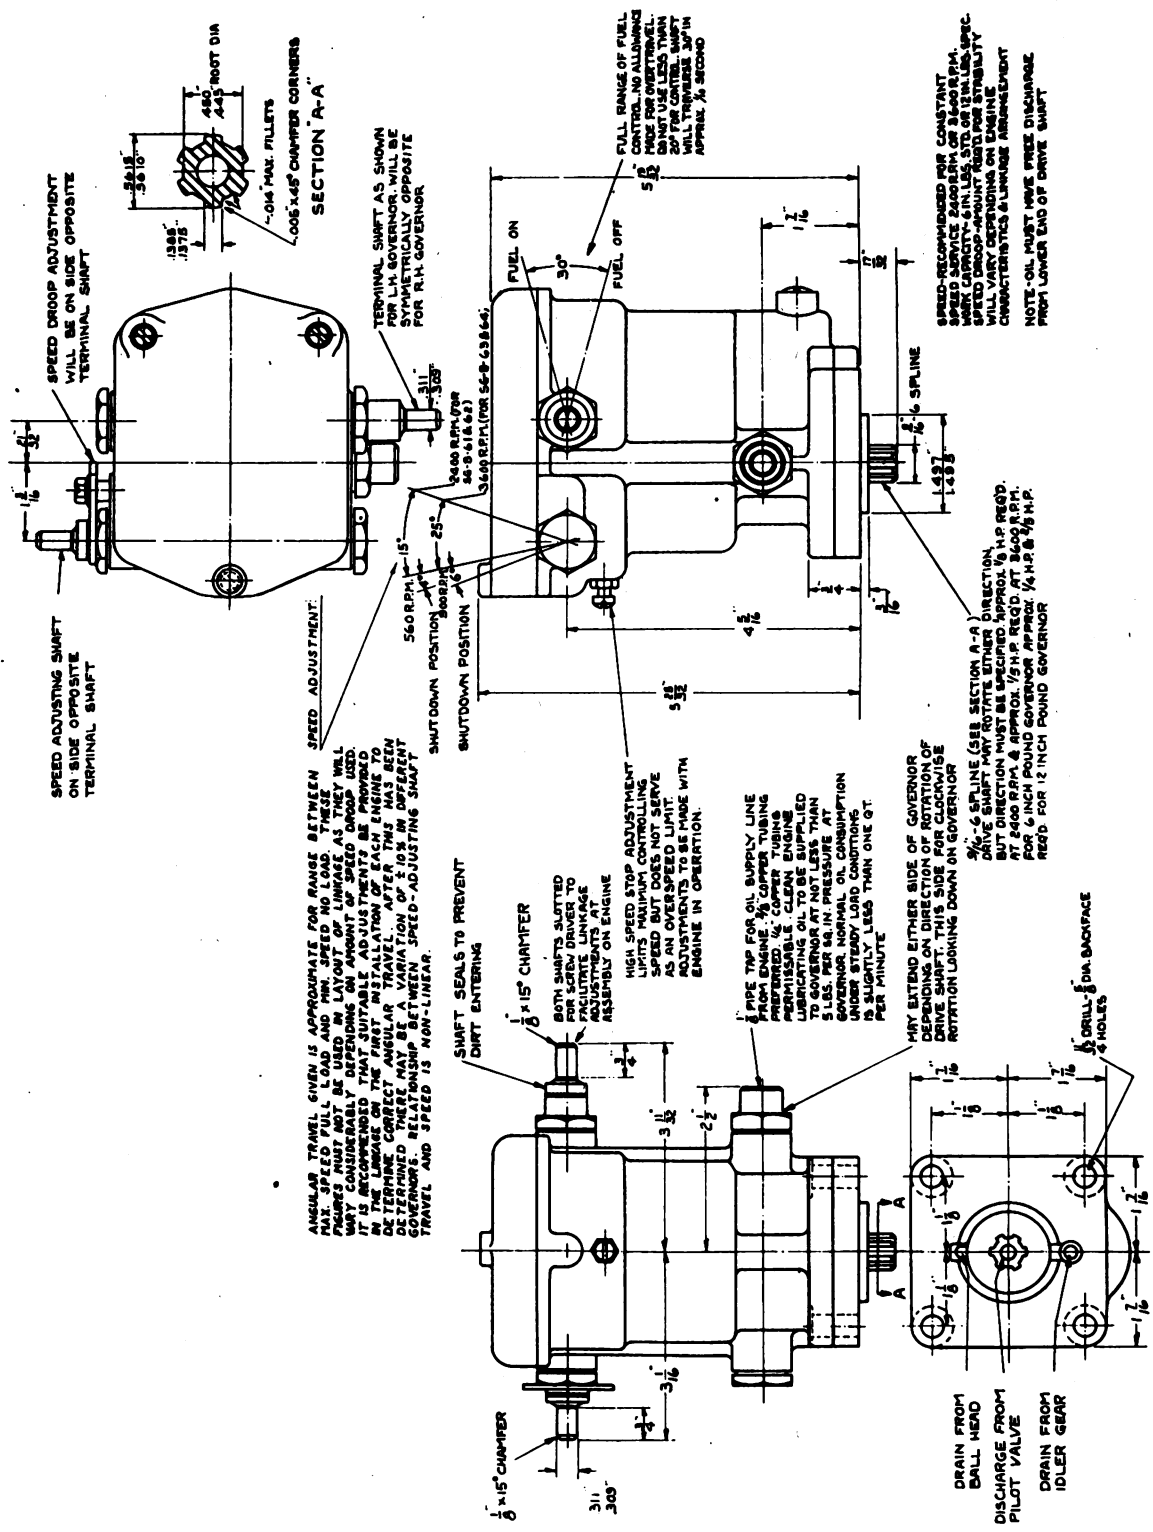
Governor installation and Operational Drawing (up to Serial No. 155895)
